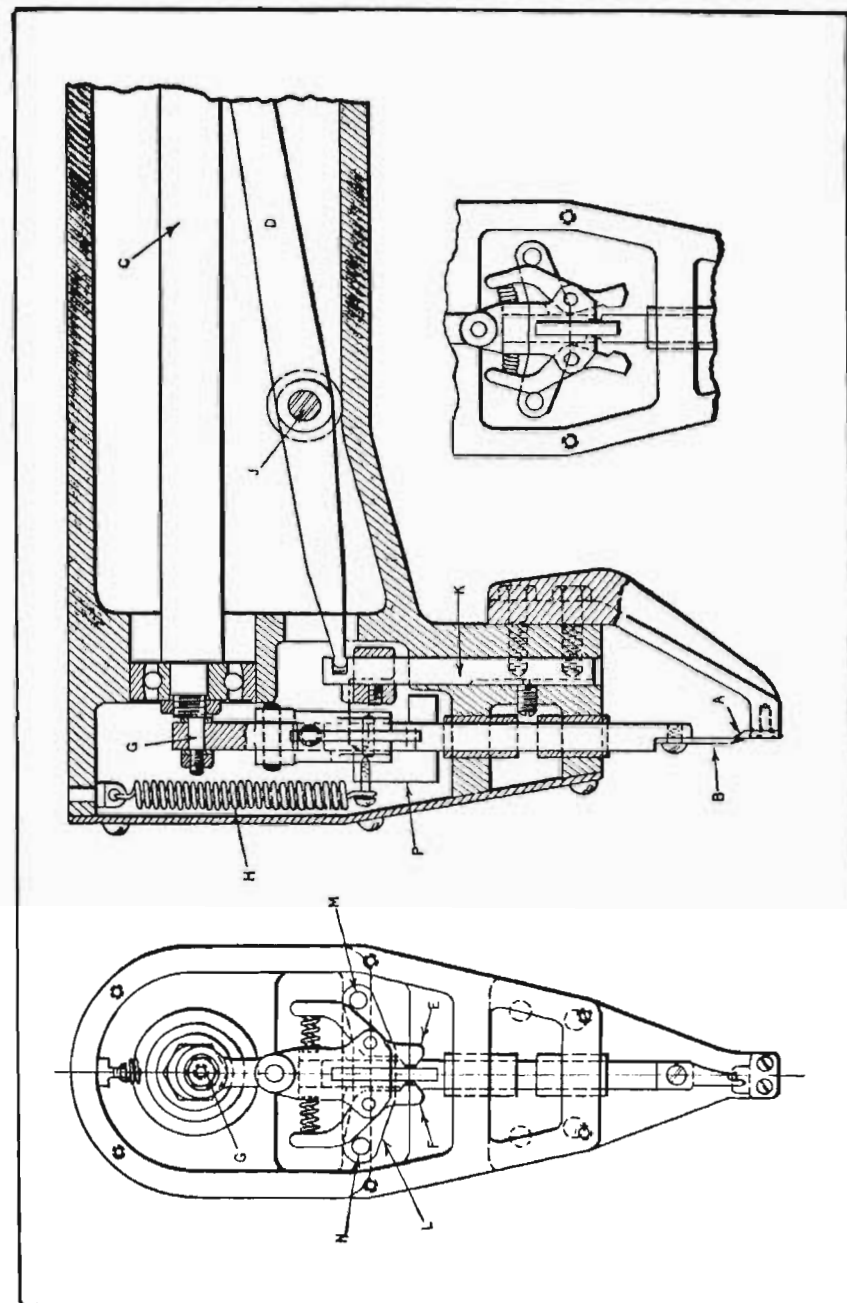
Mechanism for Quickly Stopping Cutter-slide of Stencil-cutting Machine, at the Top of its Stroke
